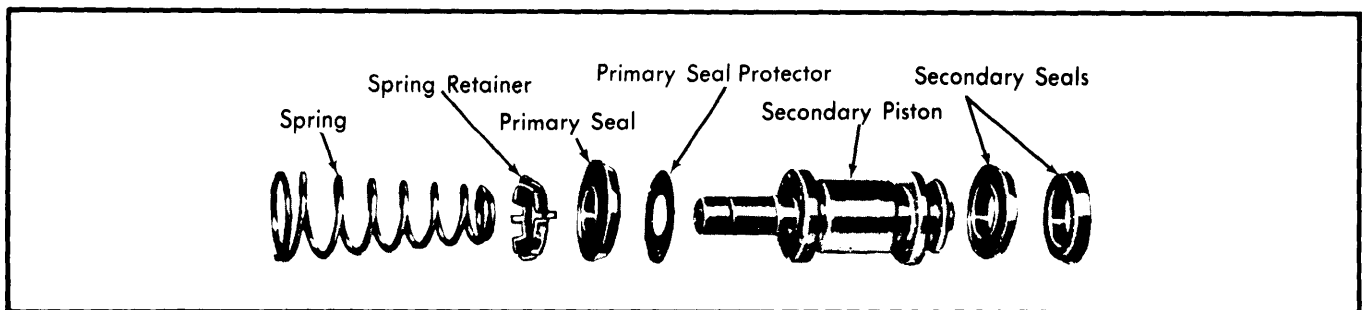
Exploded View of Typical Secondary Piston Assembly
